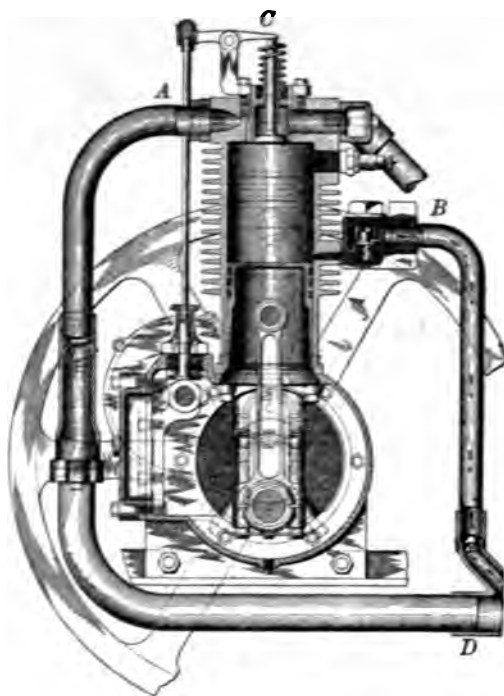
PLAN OF FRANKLIN MOTOR, SHOWING AUXILIARY EXHAUST-PORTS.
